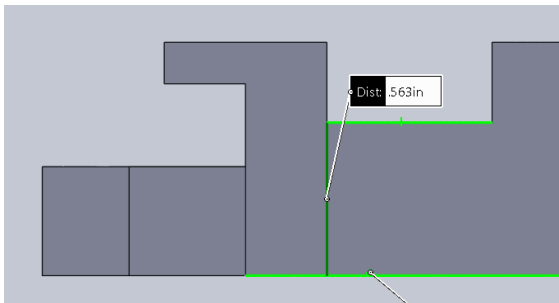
Updated Distance Between Bottom of Motor Fixture and Bottom of Stator Recess
